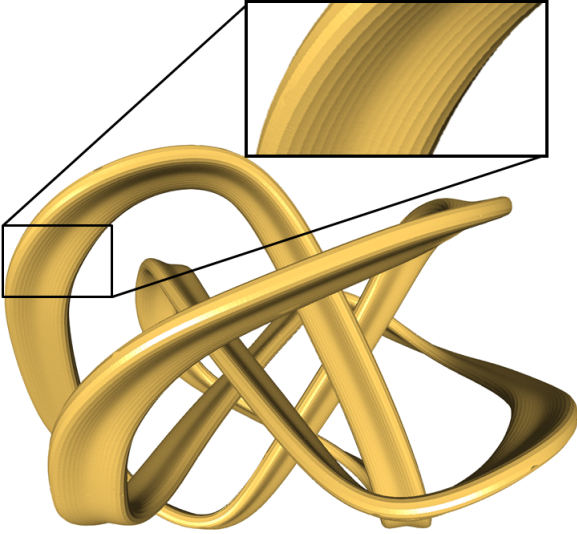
The knot model (for comparative tool size see Figure 5). Machined with a flat-end tool. A video of this machining process can be viewed at https://youtu.be/XE7Dy39_bHU.
